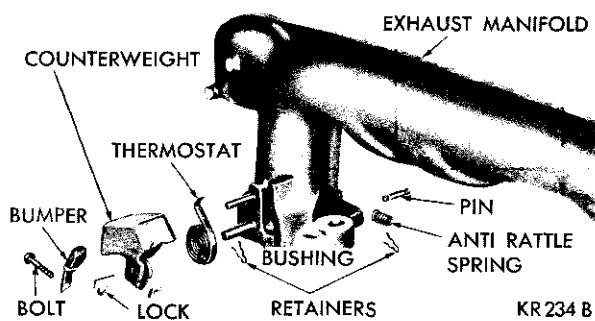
Manifold Heat Control Valve—Center Outlet Manifold
